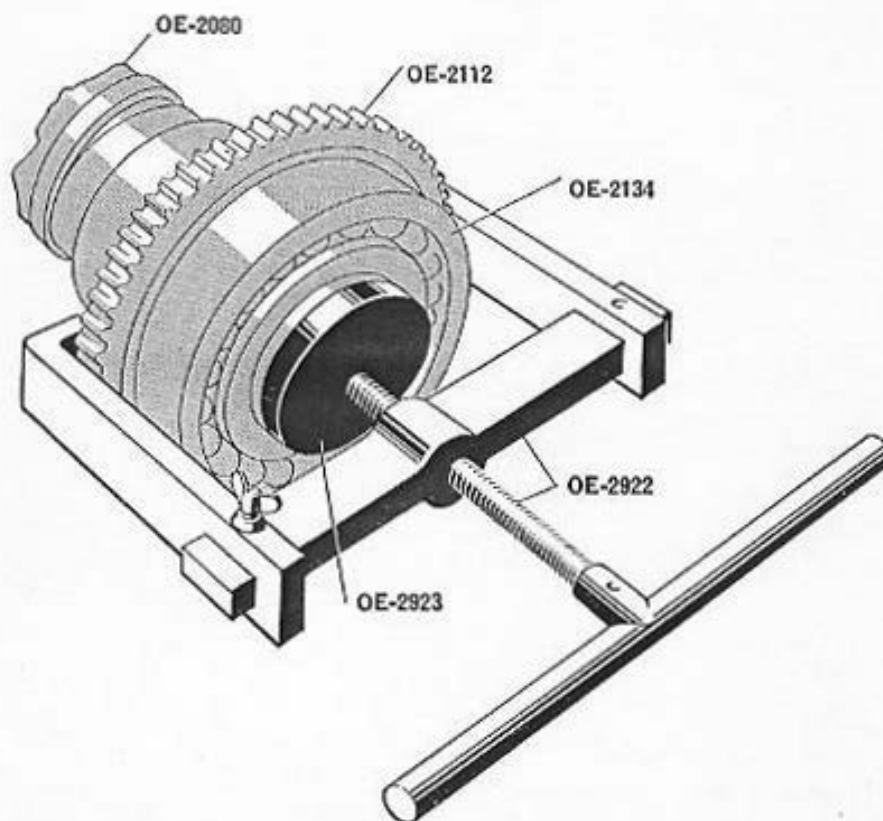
Using puller (OE-2922) and disc (OE-2923) to strip ball bearing and spur wheel from column raising spindle
